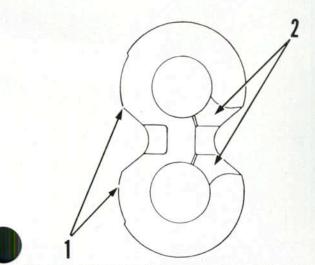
Be sure that pump bearings are installed with relief grooves (1) on inlet side of pump and recess (2) in bearings against face of pump gears.
